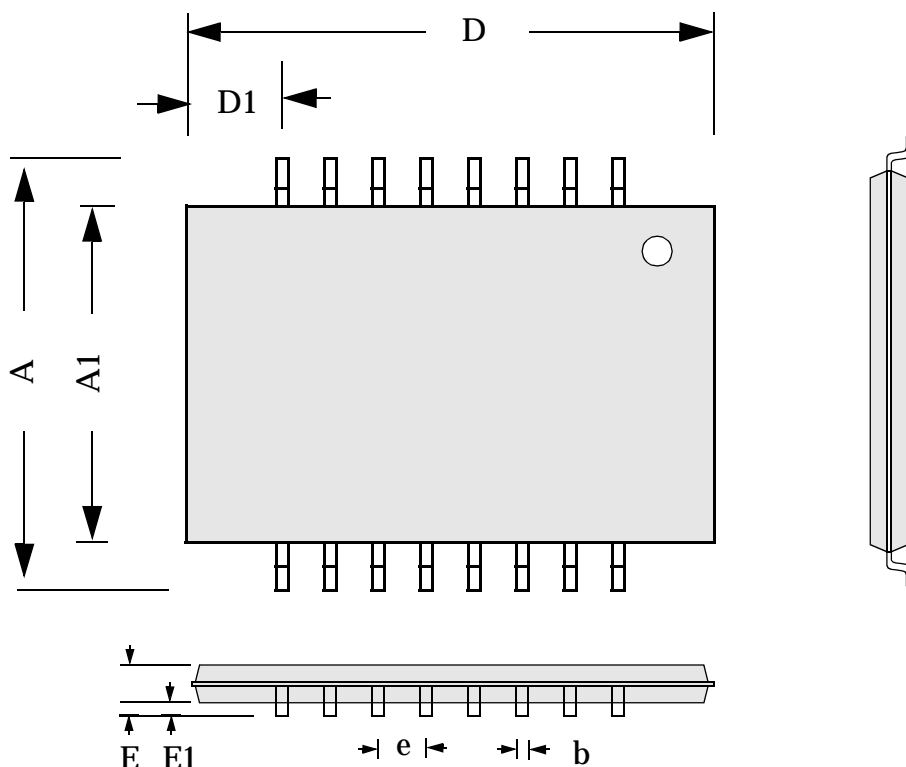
16-Pin 225mil TSSOP Package Drawing
